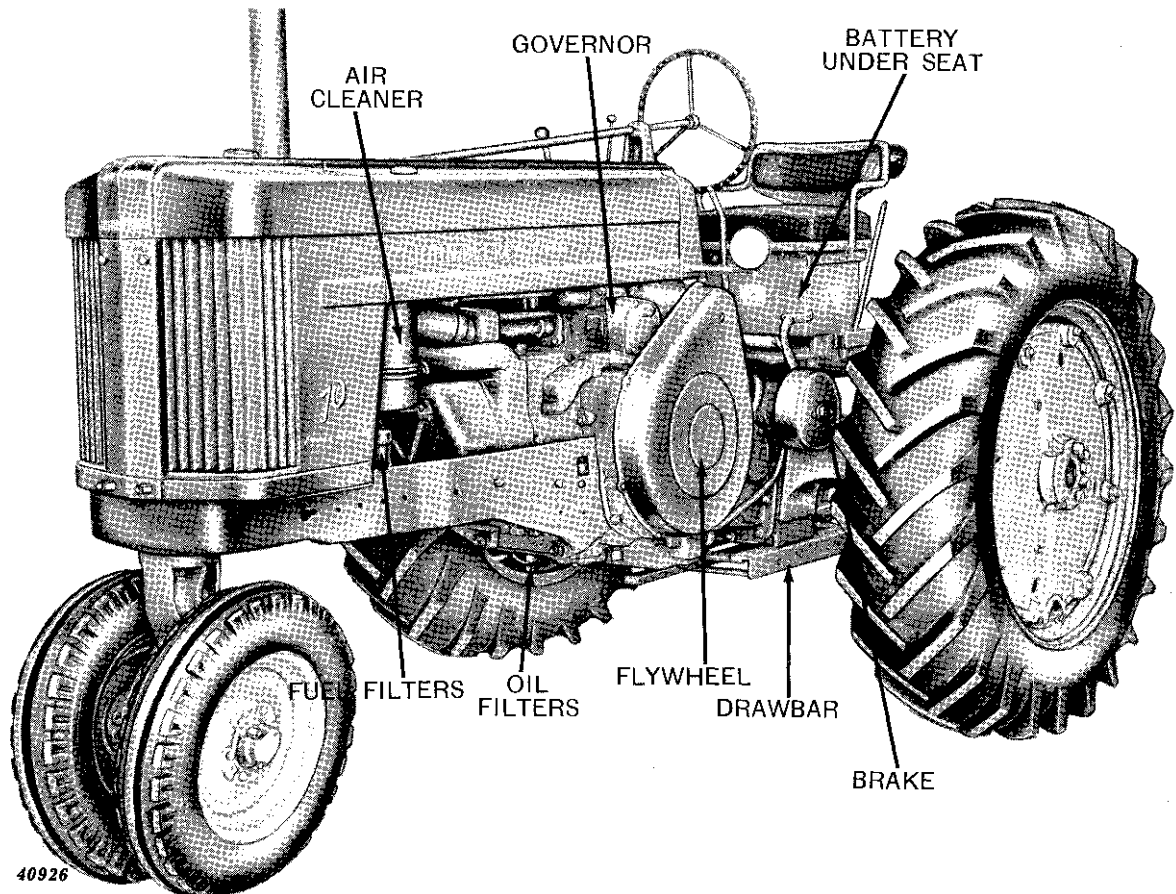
John Deere Model "70" Diesel Tractor (Standard)—Pulley Side
